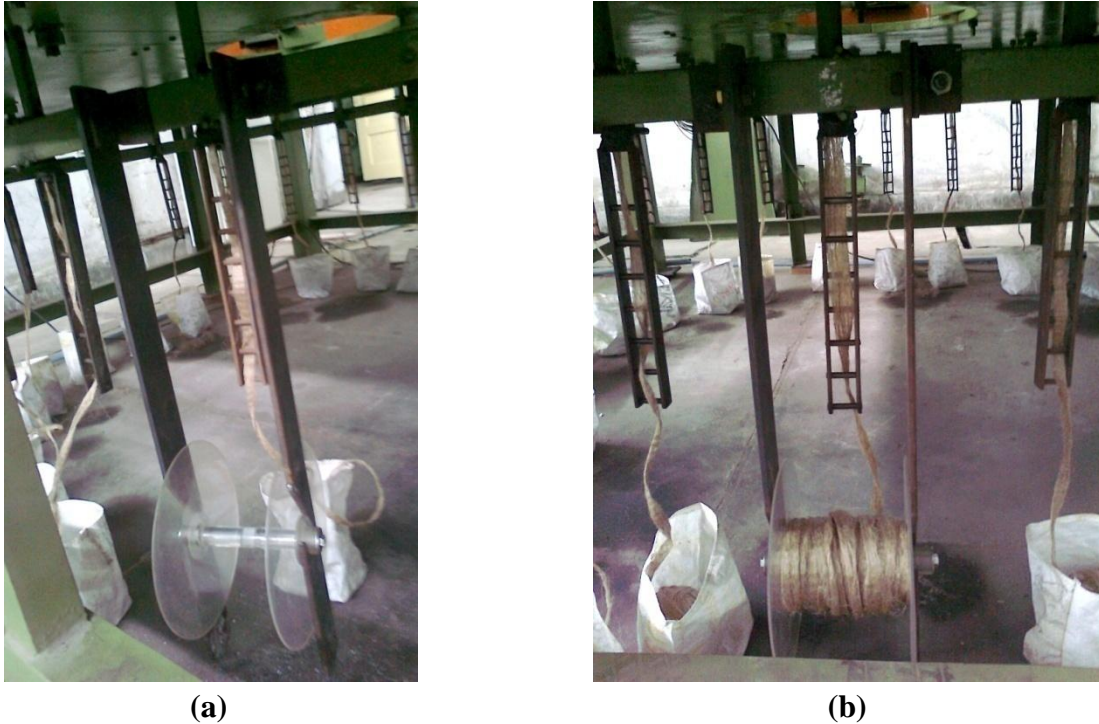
Fabricated feeder arrangement for axial material- (a) Empty bobbin, (b) Partially filled bobbin
